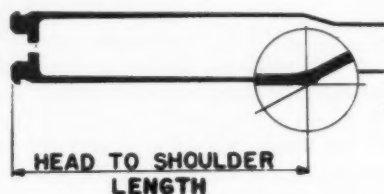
HEAD-TO-SHOULDER DIMENSION OF A CARTRIDGE CASE
